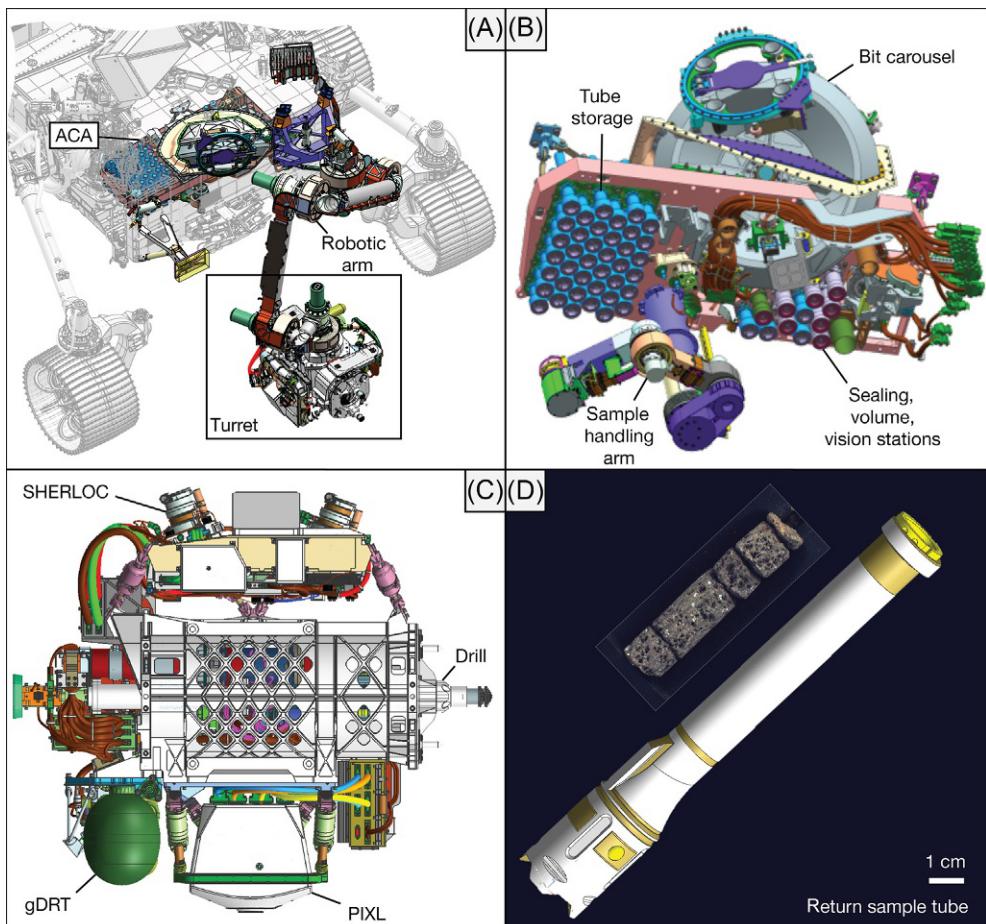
Mars 2020 sampling and caching system, including a front view of the rover (A) with turret, robotic arm, and adaptive caching assembly (ACA) indicated; a view of the ACA from below (B); another view of the turret (C) showing PIXL, SHERLOC, and drill (one stabilizer shown; bit is retracted); and a drawing of a sample tube (D) with a representative test core shown to scale.
